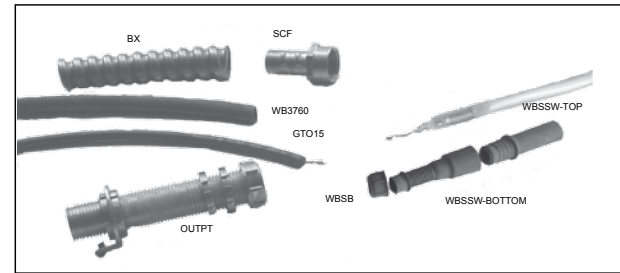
Exploded view of necessary parts for ELECTRODE TO TRANSFORMER CONNECTION when transformer is in dry or damp location while sign is in wet location.
